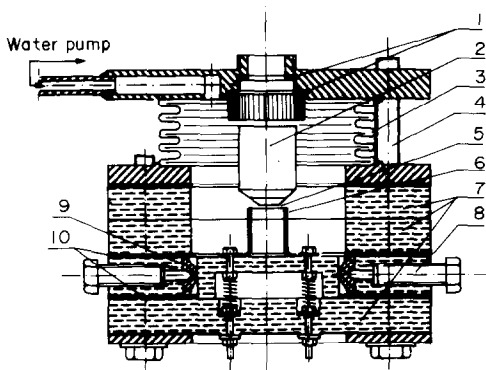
Pressure chamber. 1, Rubber seals; 2, microscope objective lens; 3, stainless-steel bellows; 4, focusing screws; 5, platinum wire; 6, wire supports; 7, perspex windows; 8, wire positioning device; 9, rubber gasket; 10, rubber sealing rings.
